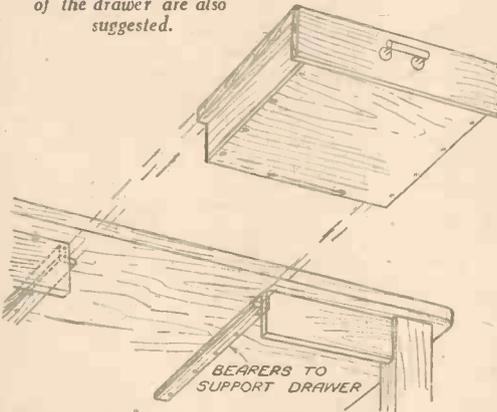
Another method of fitting a drawer to a table. Constructional details of the drawer are also suggested.
